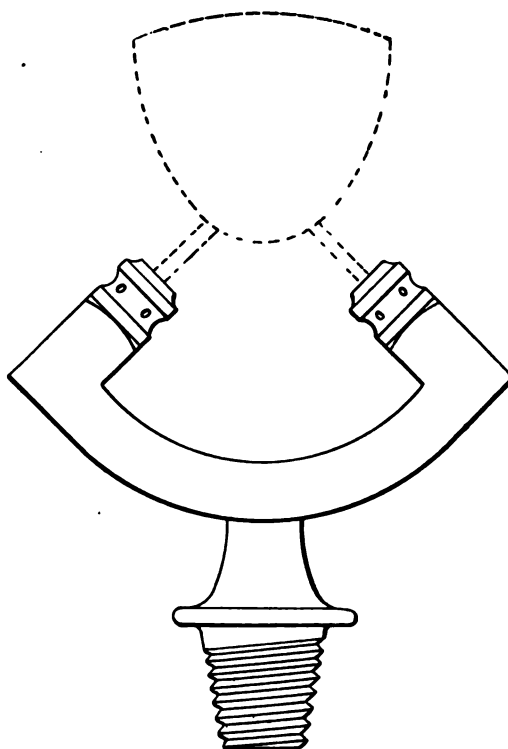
Double-armed Burner, having Jets impinging to form a Flat Flame.
